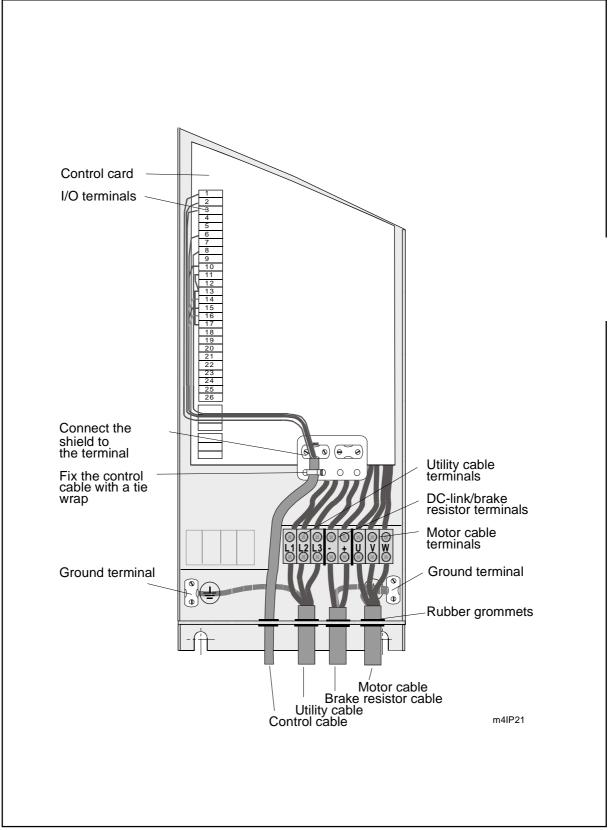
Cable assembly for NEMA 1: CXL 0030-0075HP V 3 4/5 and CXL 0020-0040HP V 3 2.
